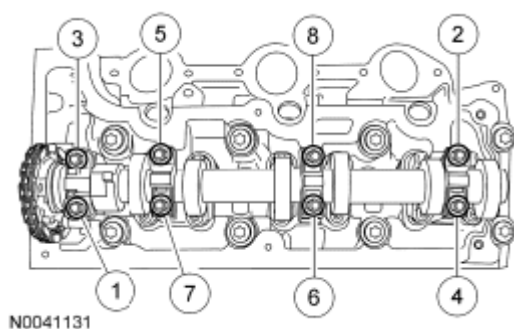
Identifying Removal Sequence Of Camshaft Bearing Caps
